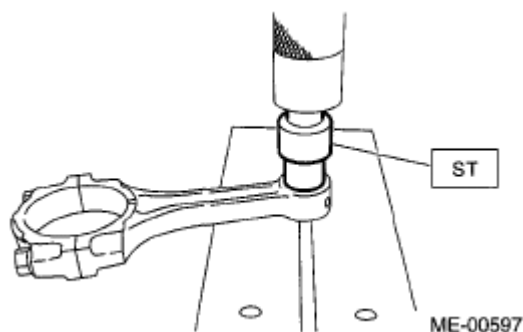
Identifying ST 18350Aa000 Connecting Rod Bushing Remover And Installer
